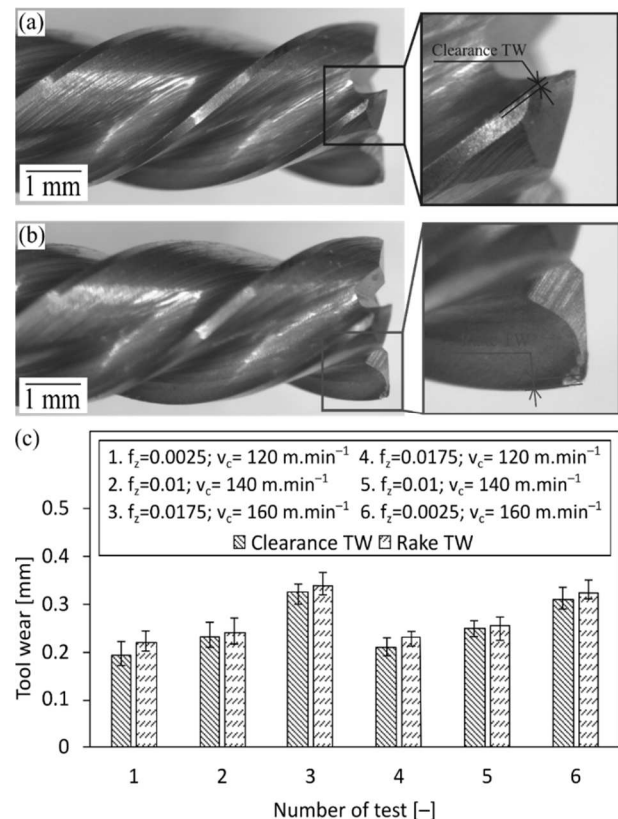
Images of tool wear obtained by the optical microscope at the end of the cutting test, (a) tool wear measured on clearance face, (b) tool wear measured on rake face and (c) visualization of tool wear for different cutting tests
